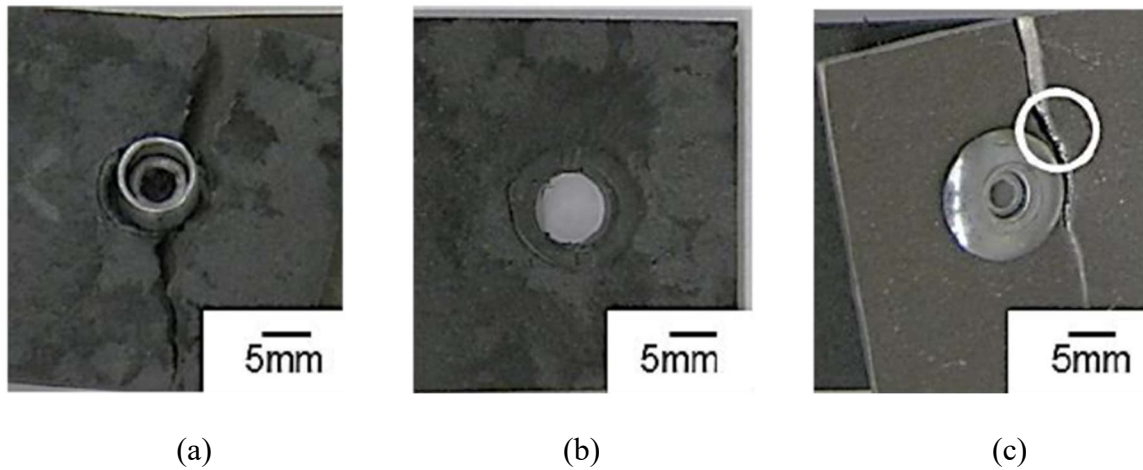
Failure modes of Mg/CFRP as-fabricated joints: (a) tension (CFRP fractured), (b) pull-out, and (c) mixed failure with tension and shearing (Mg fractured), where the circled region indicating the compression on Mg workpiece introduced by the edge of rivet head.
